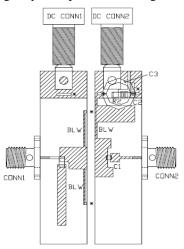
IB2729S170 Test Fixture footprint. Each half of the TF evaluation board is 0.5" wide constructed on high dielectric laminate.
